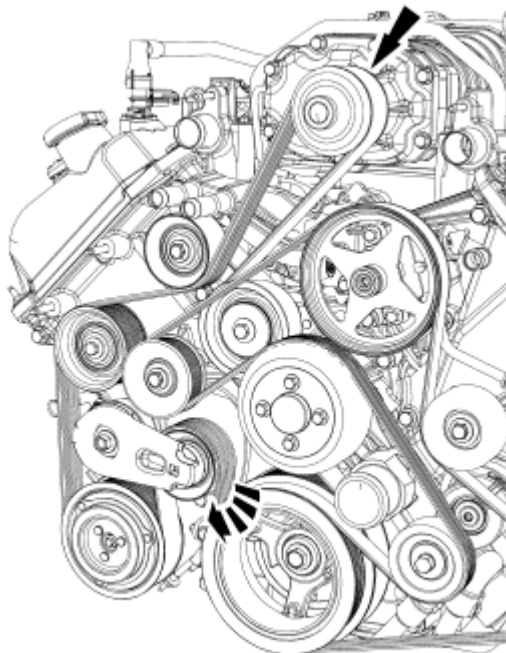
Rotating SC Belt Tensioner Clockwise & Remove SC Belt Off SC
